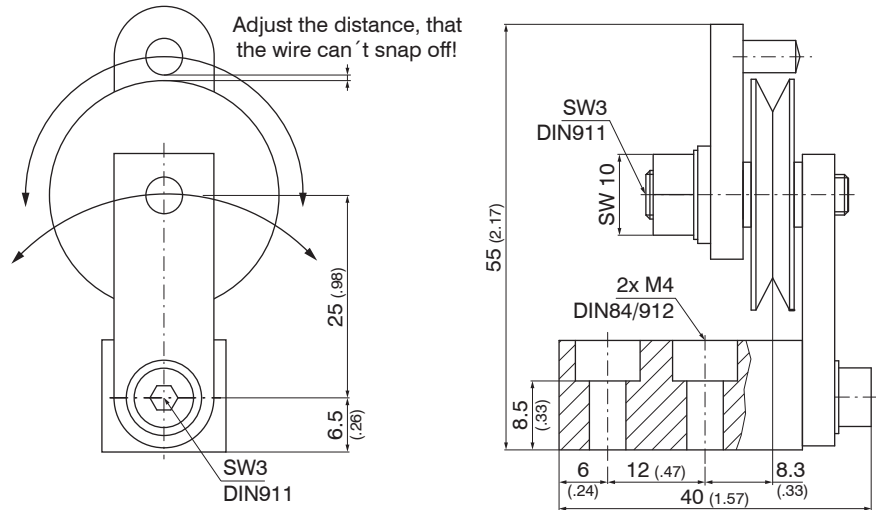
Guide pulley TR1-WPS with mounting socket, dimensions in mm (inches), not to scale
